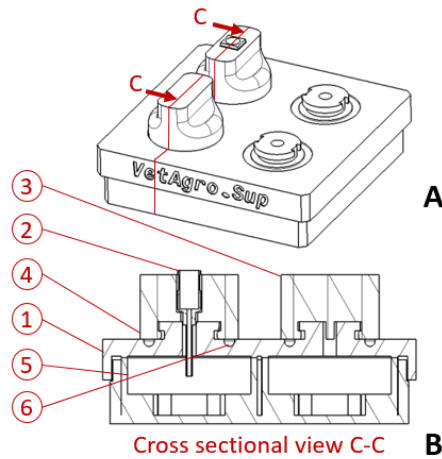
Schematic of the 3D printed bioreactor. A. General overview. B. Cross-sectional view C-C: (1) upper part, (2) nozzle, (3) sterile cap, (4) nozzle tip, (5) lower part, (6) O-ring.
